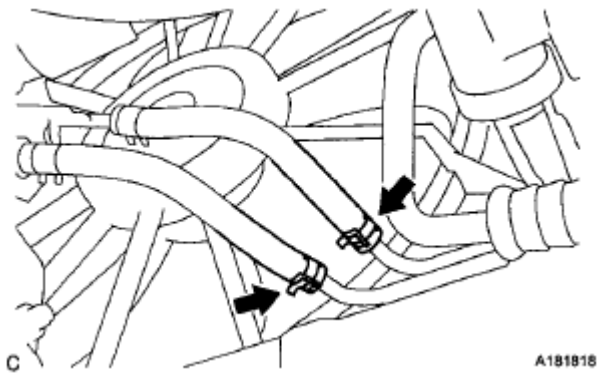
Locating Oil Cooler Hoses To Oil Cooler Tube
